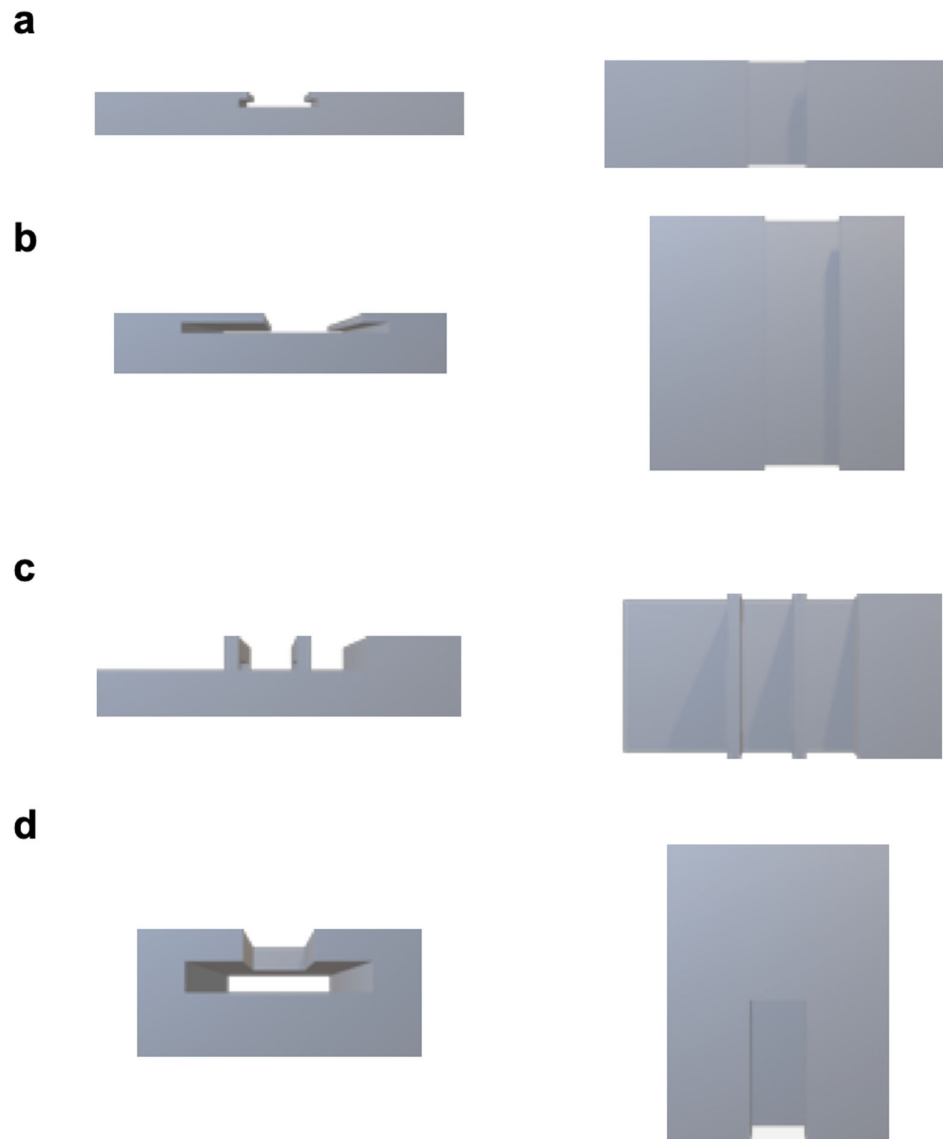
3D printed holders used to fabricate and align the parallel-plate contact device. (a) Top view (left) and (b) side view (right) of holder for the parallel plate device used to perform impedance measurements. (c) Top view (left) and side view (right) of slider used to position the double-sided tape exactly to fabricate the device. (d) Top view (left) and side view (right) of the holder used to position the upper contact precisely on the lower contact.
